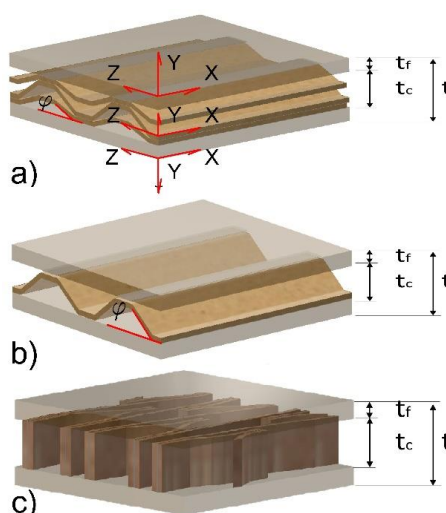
Shape and dimensions of samples used in testing: a, double (D), b) single (S), c) elliptical: t_f – facing thickness, t_c – core thickness, t – panel thickness
